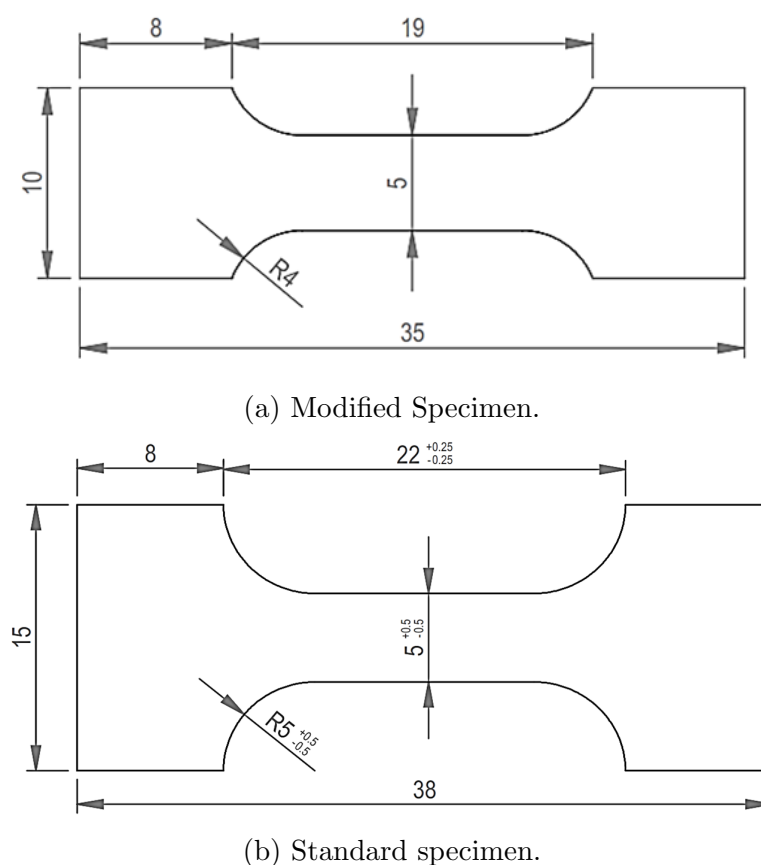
Dimensioned drawings of modified and standard tensile specimens. All dimensions in mm.
